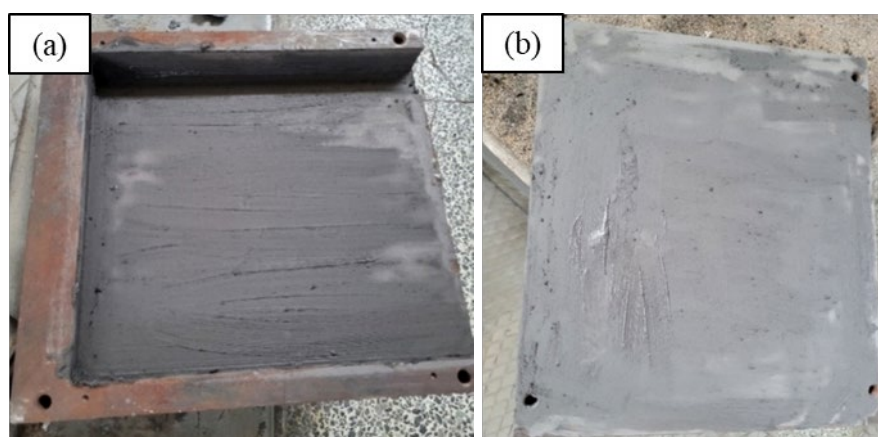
Metal mould with zirconium silicate coating. (a) the mould side with the riser feature. (b) the cap side of the mould.
